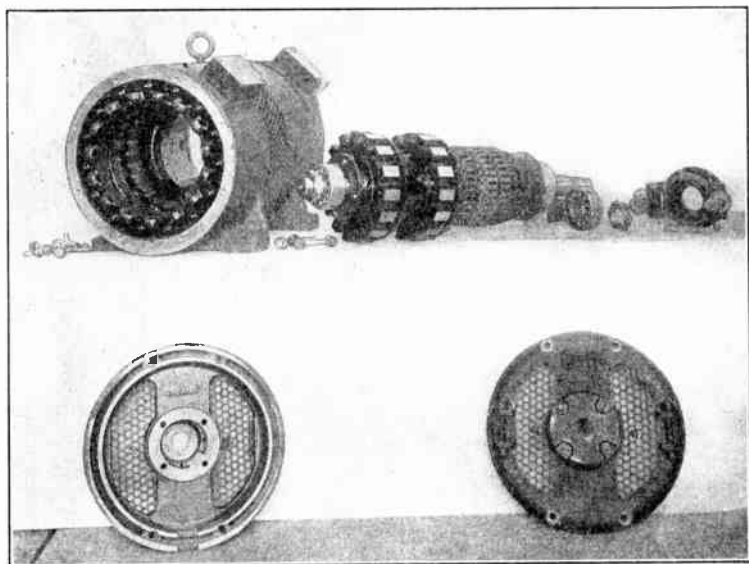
Exploded View of Crocker-Wheeler 2 KW. Motor Generator with Inductor Type of Alternator.
